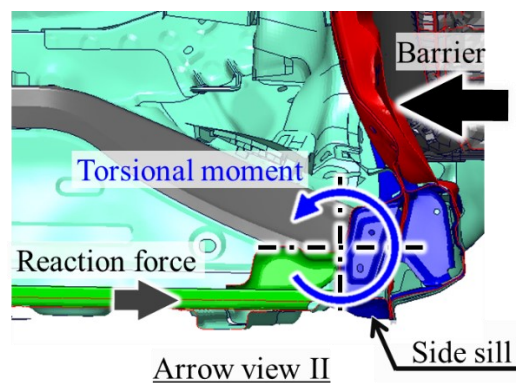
Side sill and roof rail in the Car body structure.
